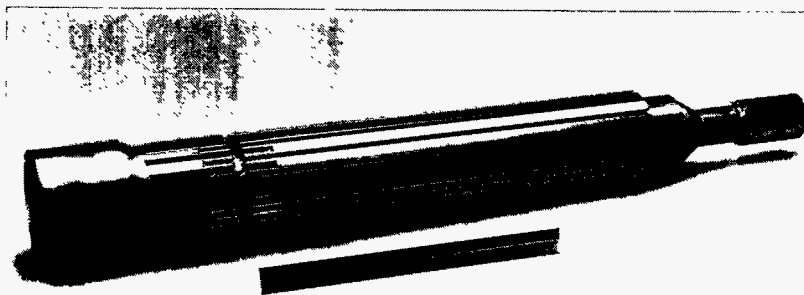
Babcock & Wilcox prototype safety lead assembly.
